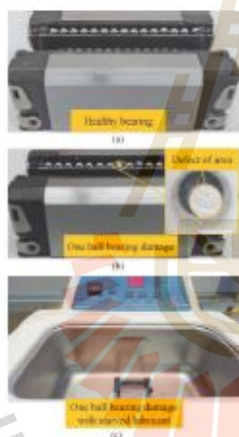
(a) Healthy bearing (b) One ball bearing damage (c) One ball bearing damage with starved lubricant
